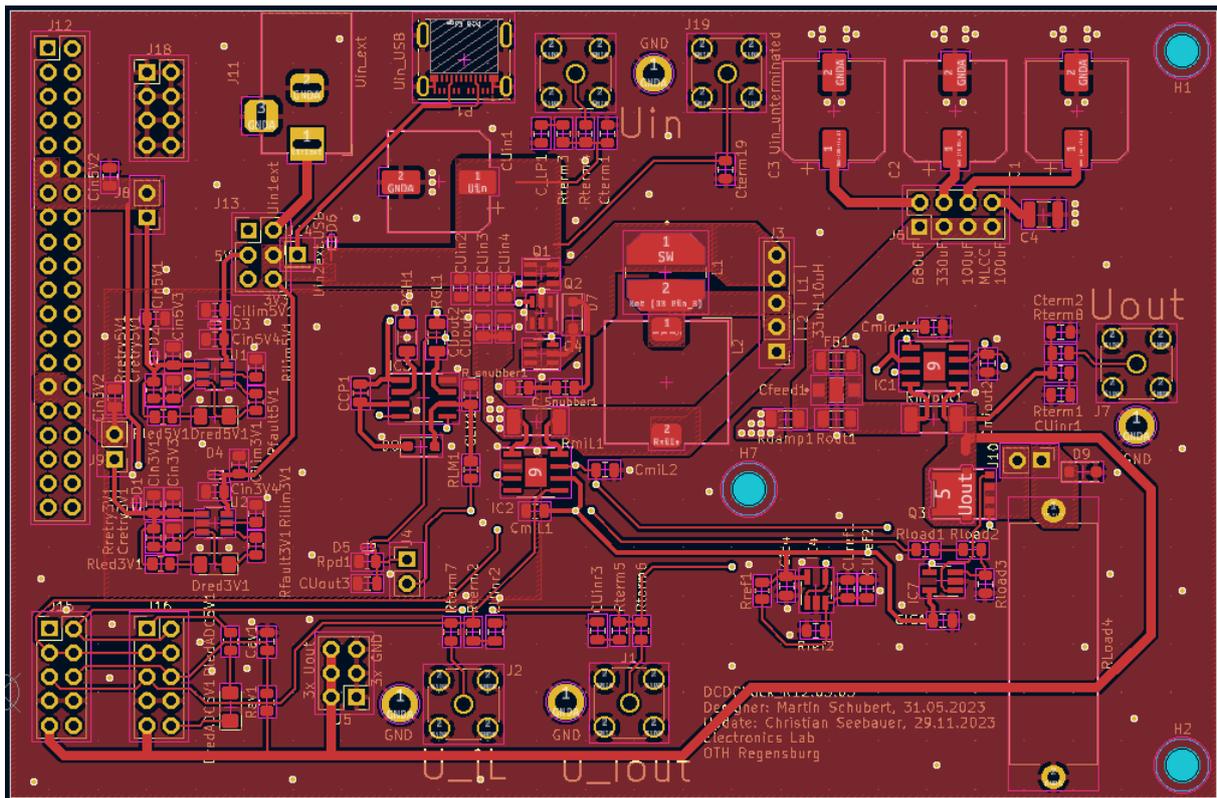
(a): DCDCbuck_R12.03 front-side copper layer (KiCad [19])
